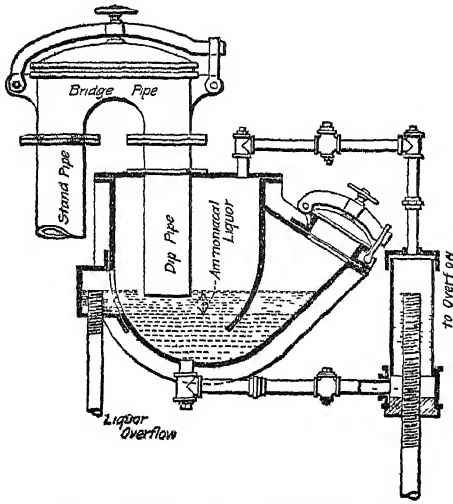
CROSS SECTION OF HYDRAULIC MAIN
